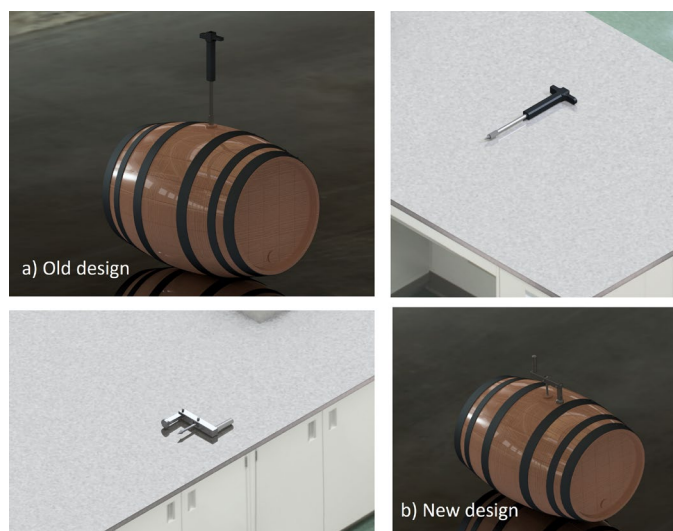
(a) Bung removal traditional design; (b) bung removal new design.
